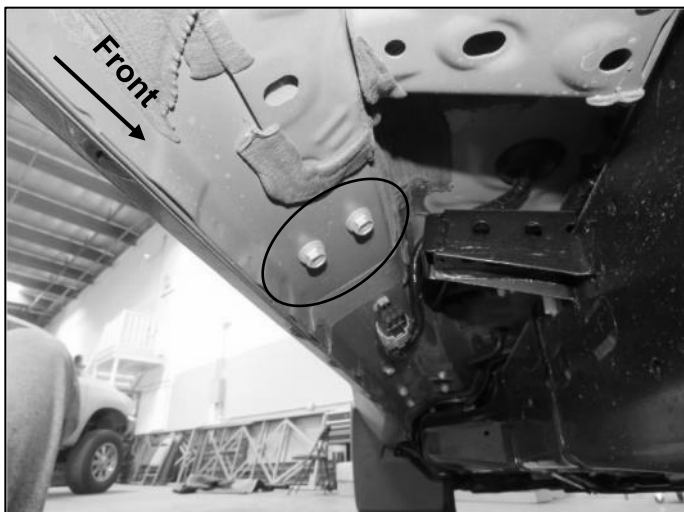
Locate the front mounting location circled and remove the OEM 8mm bolts.
